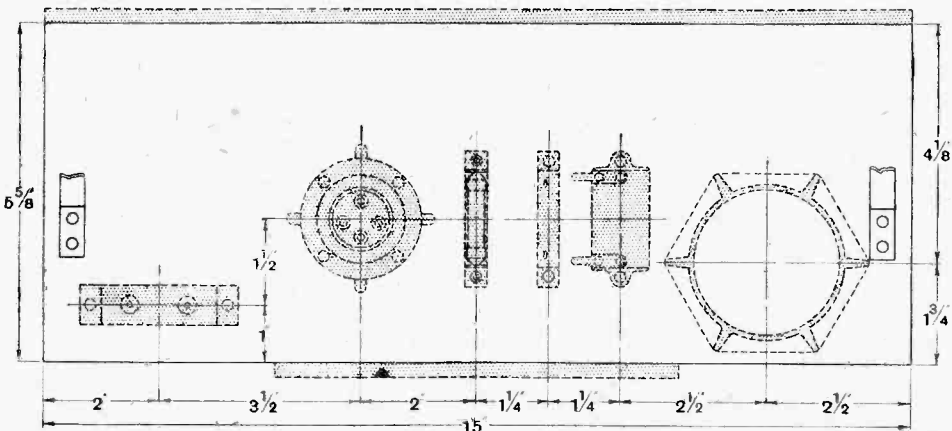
Layout of baseboard. All components should be well spaced as shown.
